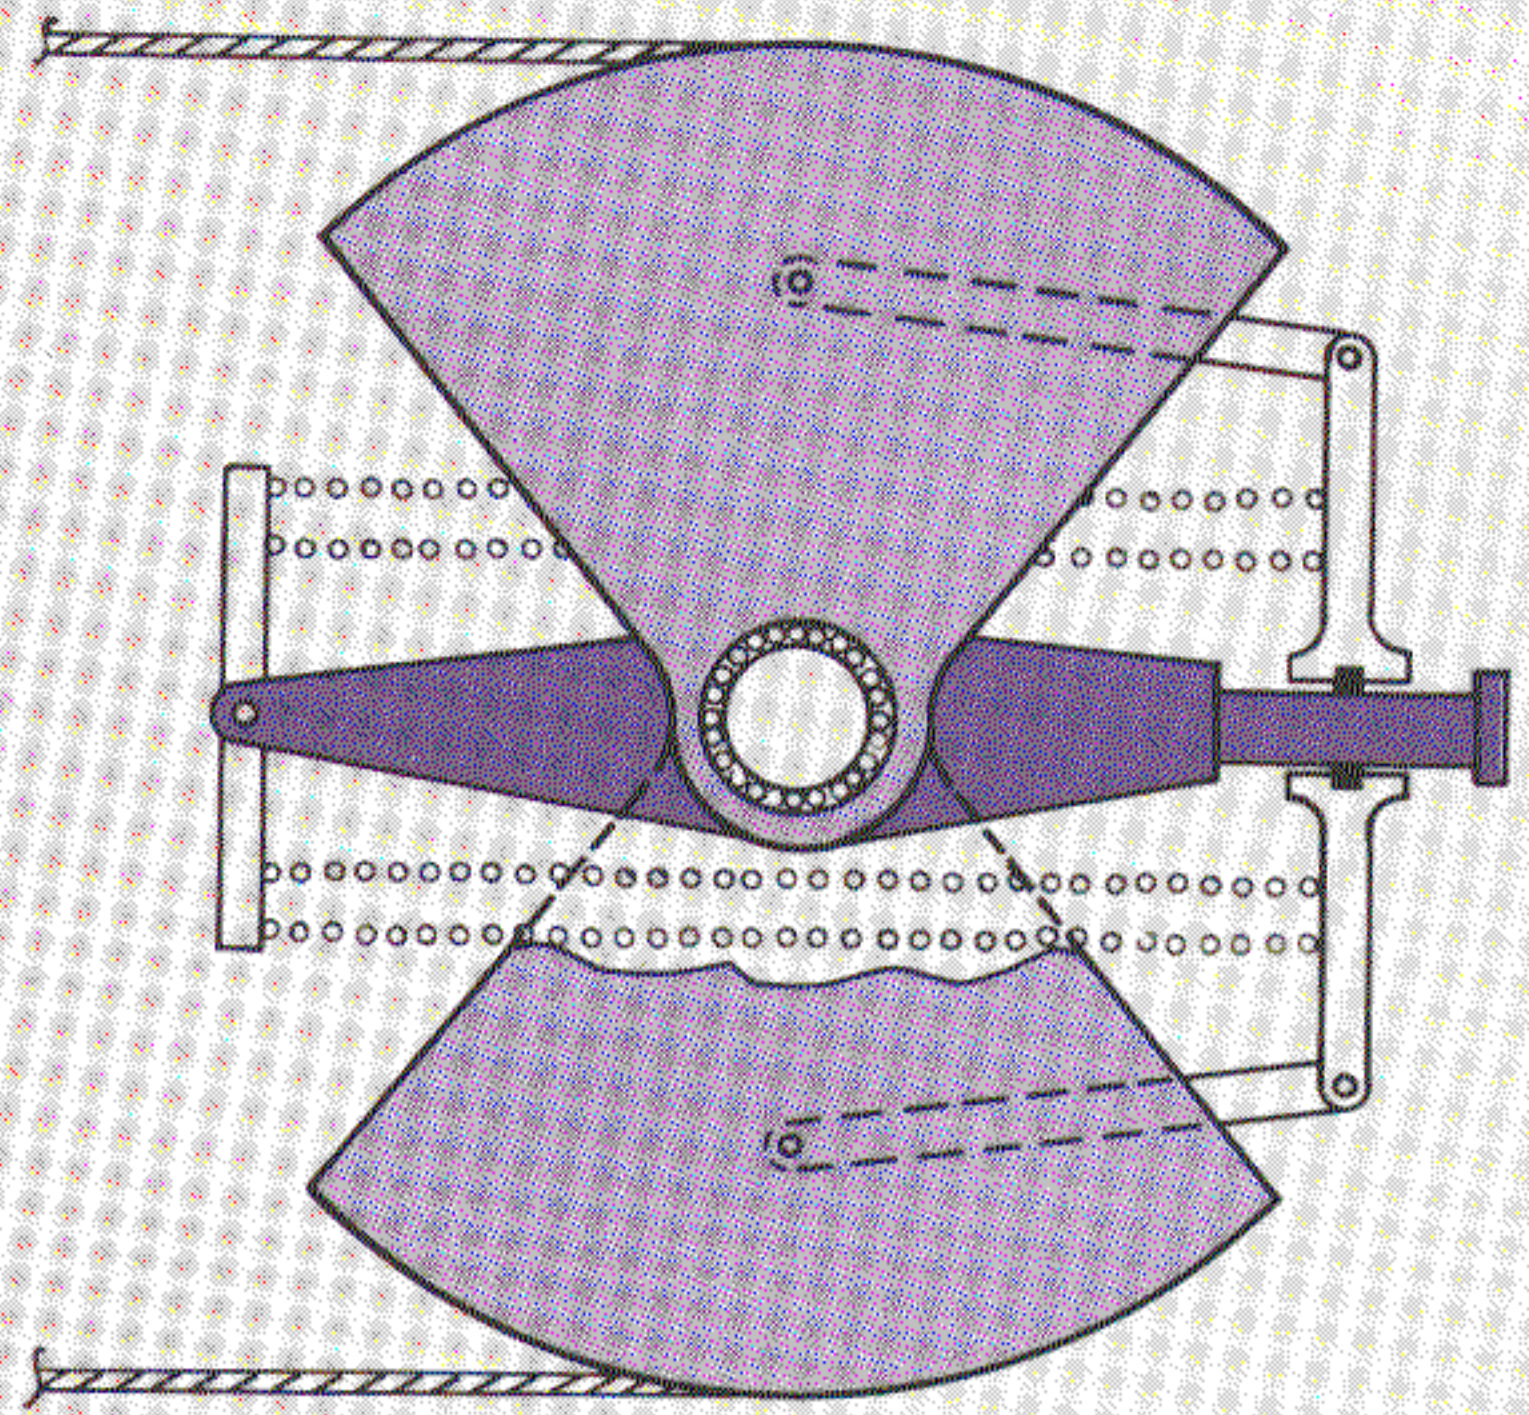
Cables Have Equal Tension and Crosshead is Free to Slide on Spindle
